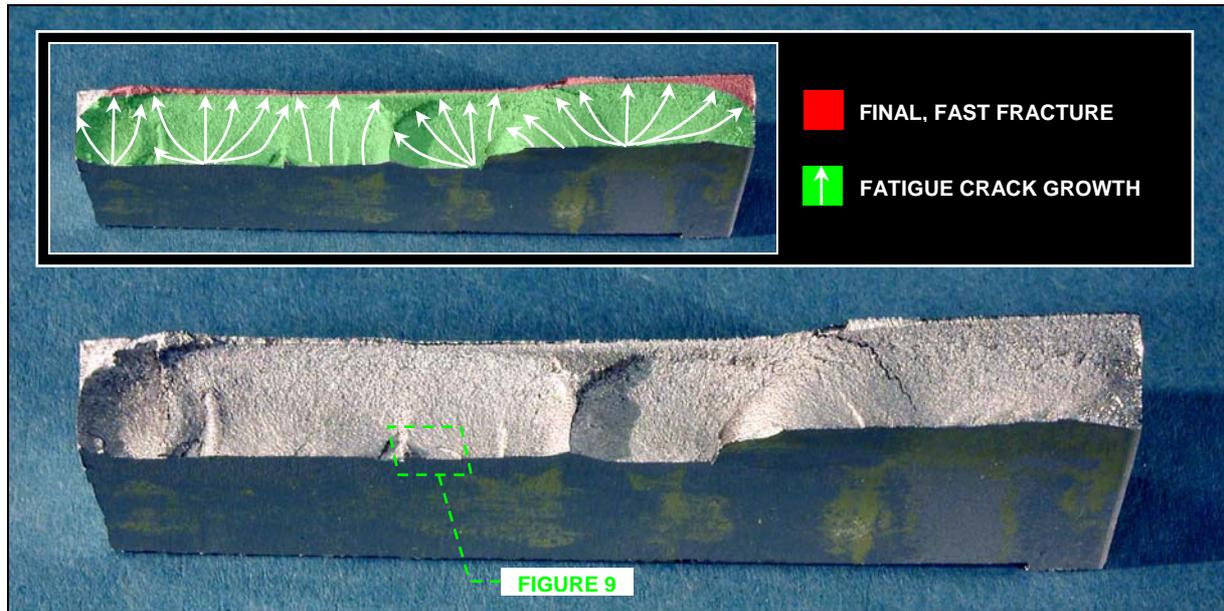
Close view of the fracture surface of section C, as indicated in figure 3. Fatigue cracks had initiated at the concave surface of the spring and grew primarily in the direction of the convex surface.
